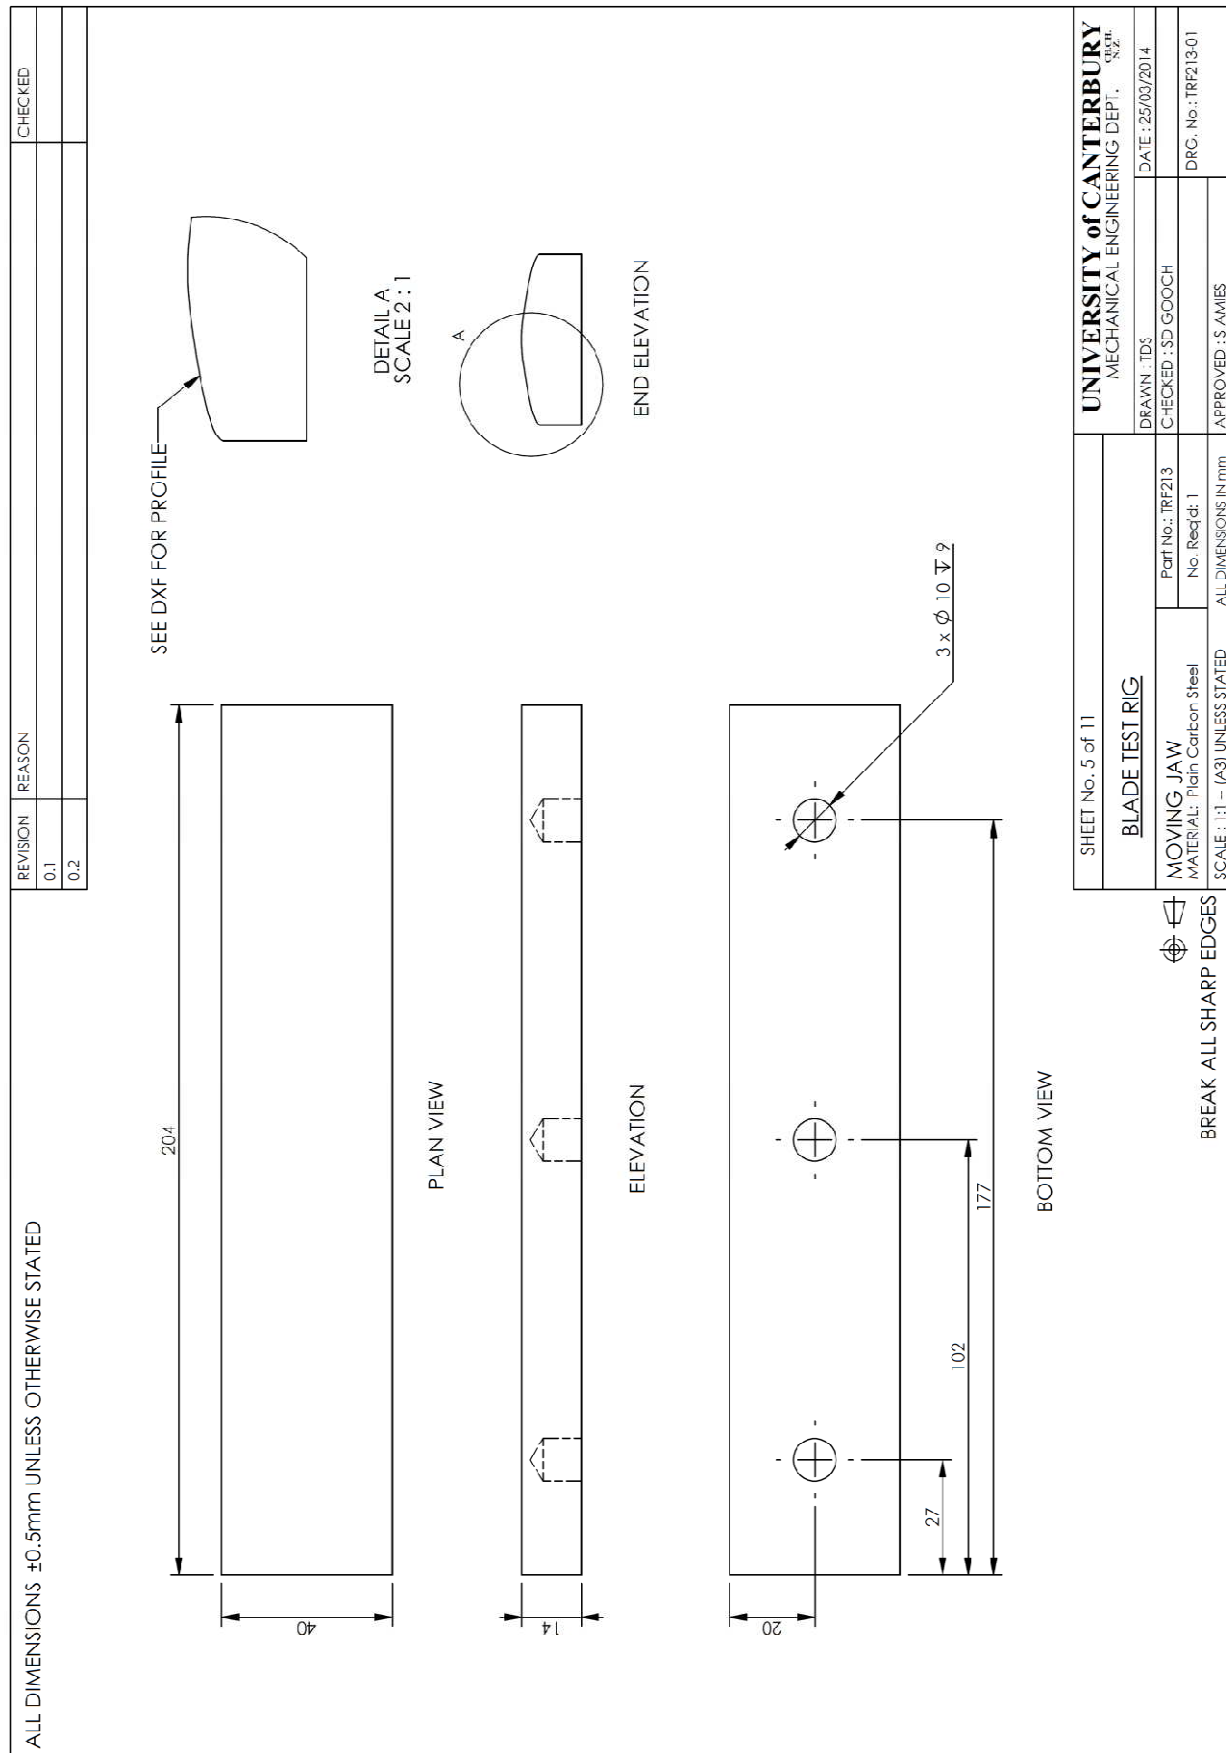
Manufacturing drawing of the floating jaw in upper pivot of the fatigue testing rig.
